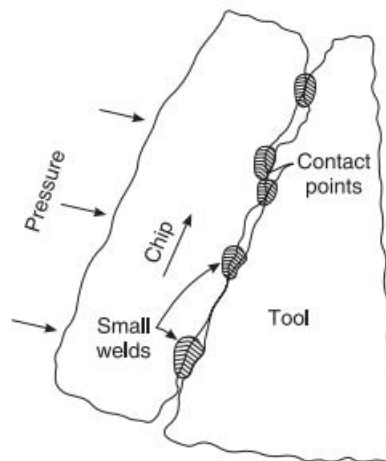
Showing point of contacts and metallic bonds (welds) formed between mating surfaces of chips and tool JP Kaushish page 313[17]
